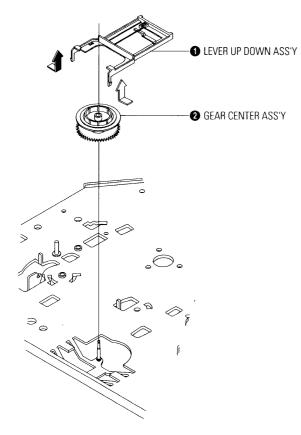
Lever Up Down Ass'y, Gear Center Ass'y Removal
